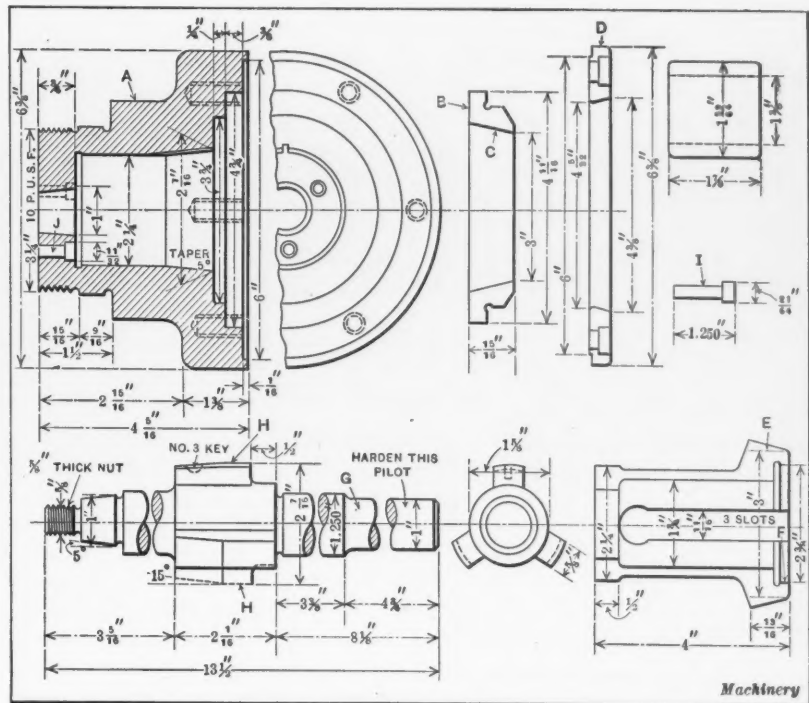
Parts of the Special Collet Chuck that is used on the Machine shown in Fig. 2 for holding Throw-out Sleeve shown in Fig. 5
